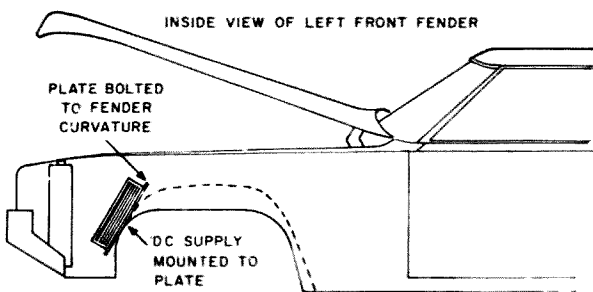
Power supply mounted against metal car body for maximum heatsinking.
